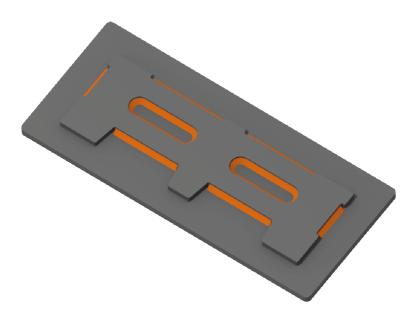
Test piece designed for welding tests within the project.
